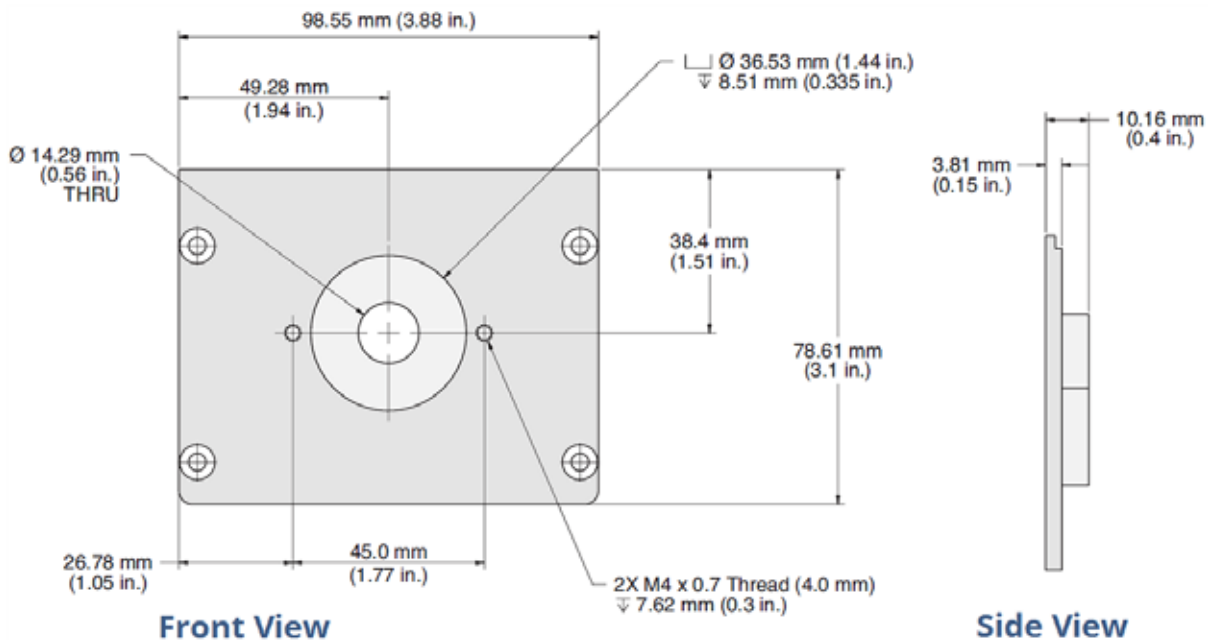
Dimensions – Optional QBH-Mount Front Plate
